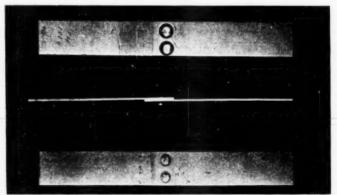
Type of Riveted Specimen Cut From Magnesium Alloy Sheet, 0.064 in. Thick. 306
